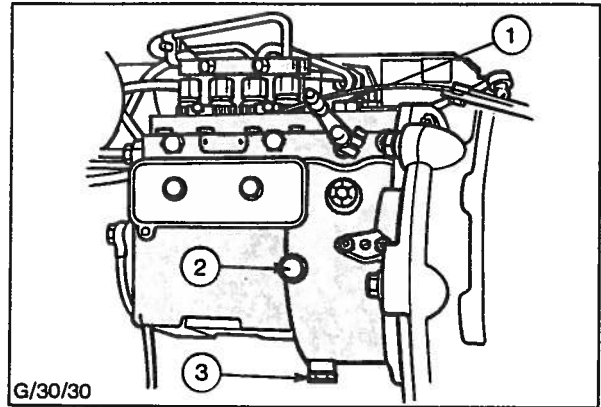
Injection Pump Oil Plugs (Class 'A' and Combine Harvester Governing only)
